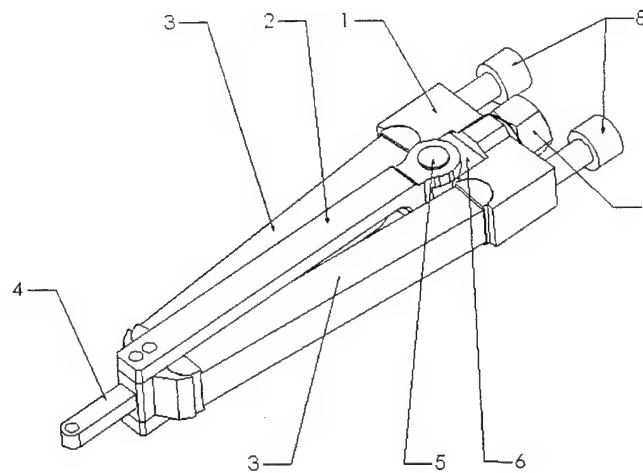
Actuator construction: 1-base, 2-lever, 3 – piezoelectric stacks, 4 – actuator tip, 5 – pivoting pin, 6 – pre-loading element, 7 – nut, 8 – mounting bolts.
